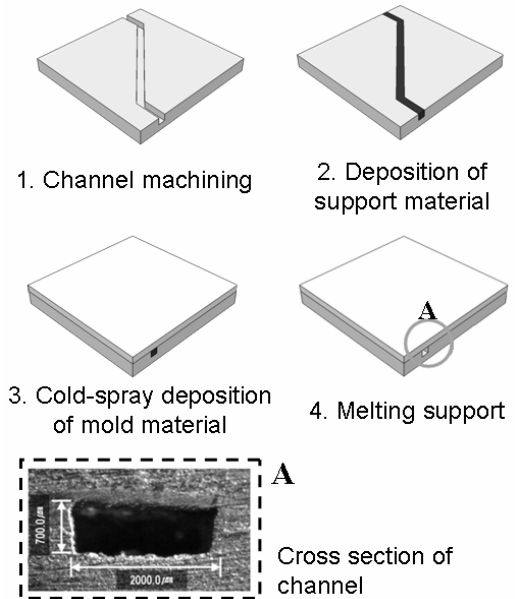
Fabrication of channel using support material and cold-spray in injection mold
